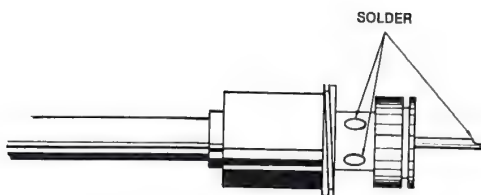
Preparing coaxial cable for soldering to a plug.
